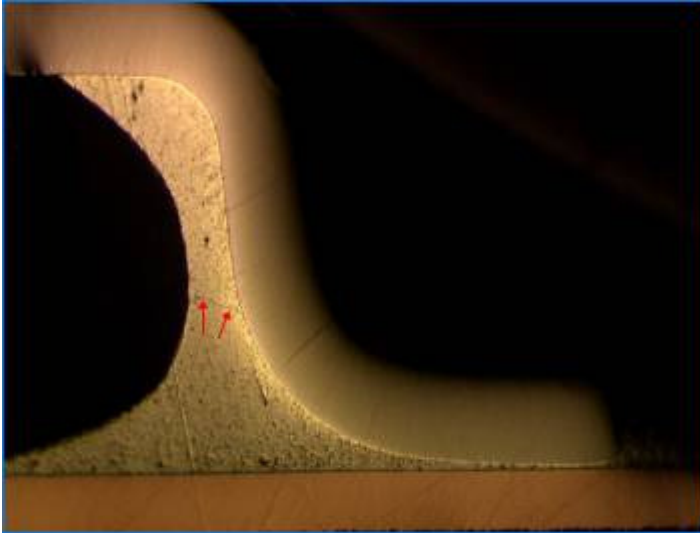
cross section, SN63, U16, right lead solder crack, 100x
